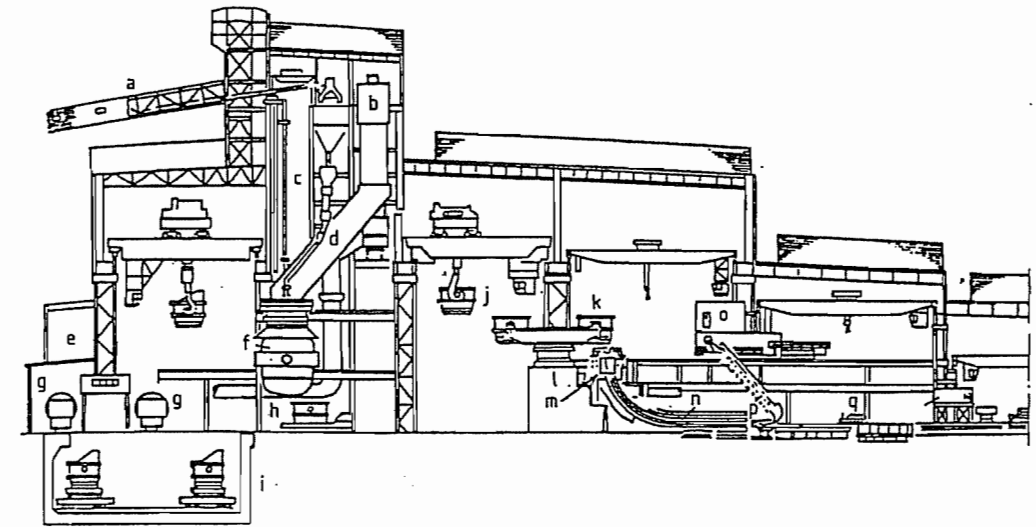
Converter and continuous casting plant: a) Feeder conveyor belt; c) High bunker; c) Blowing lance; d) Chute; e) Control room; f) 310 t converter; g) 600 t torpedo ladle car; h) Ladle transporter; i) Pig iron filling pit; j) Filled ladle; k) Pouring ladle; l) Ladle turret; m, n) Continuous casting machine; o) Continuous casting control room; p) Dummy bar; q) Cutting.
